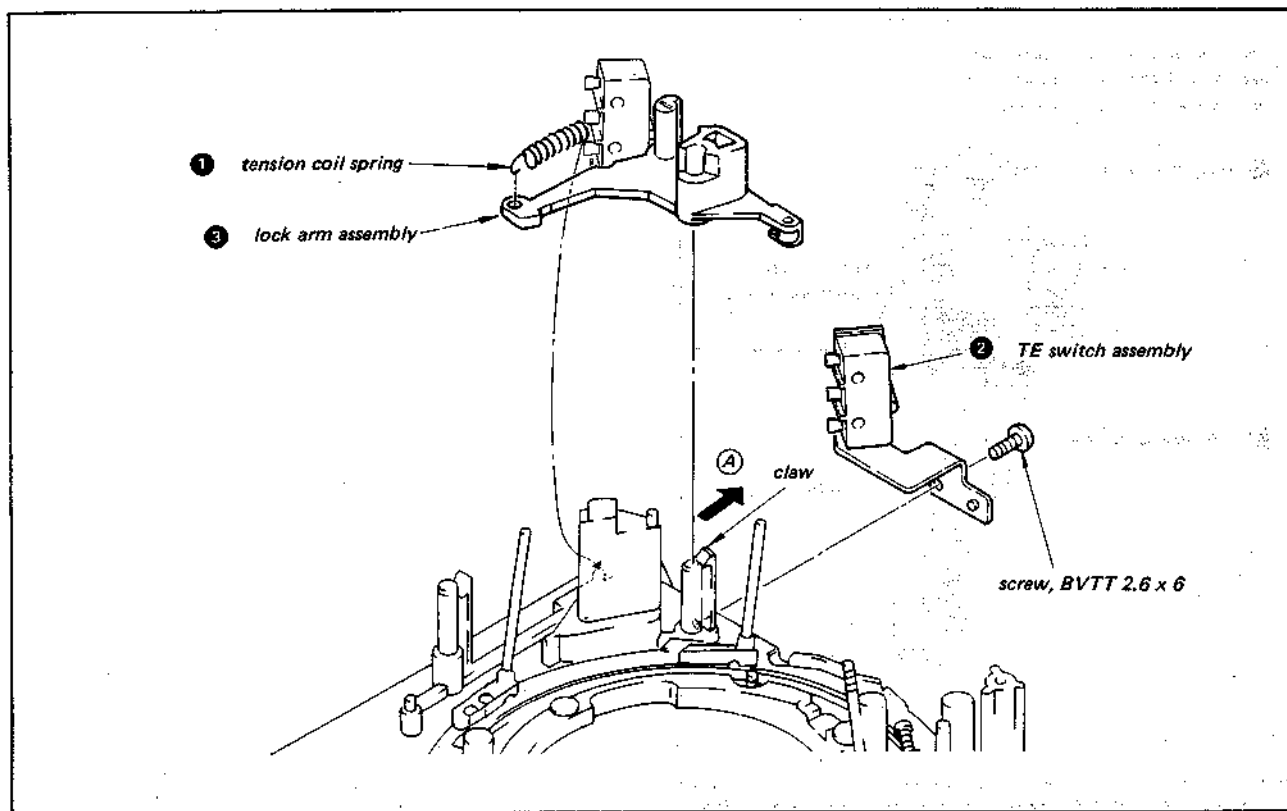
Removal of the TE switch assembly and lock arm assembly
